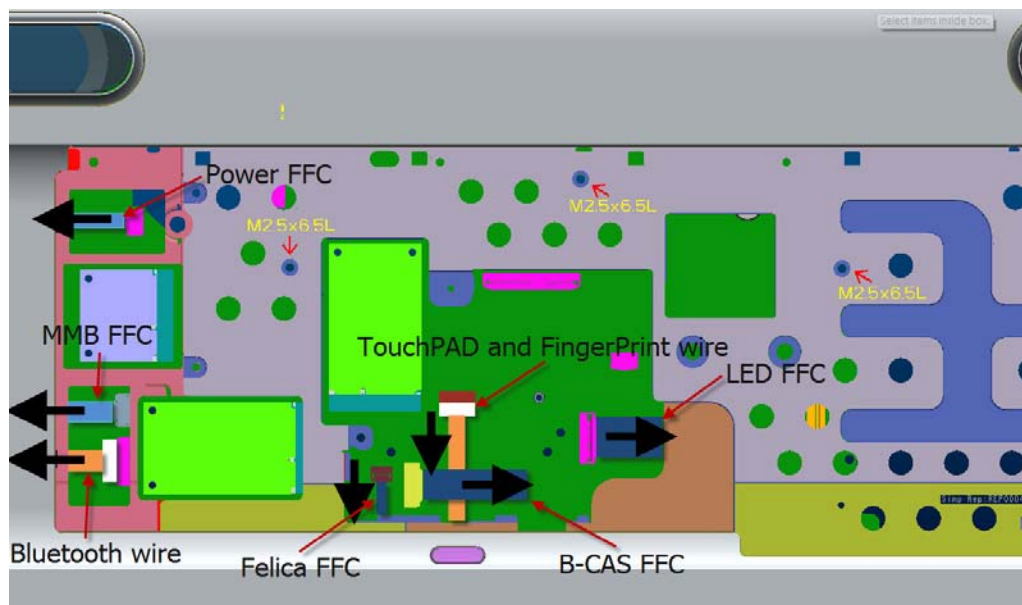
Disconnect the touch pad flat cable/Fingerprint cable
